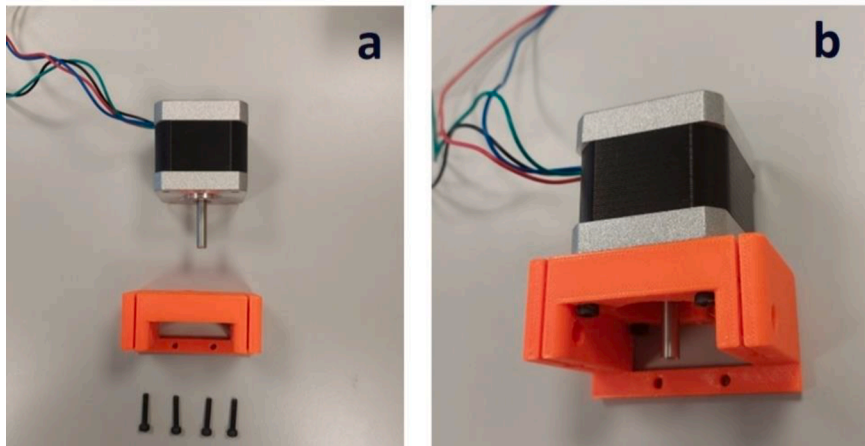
Assembly of the NEMA 17 stepper motor to the end motor support. (a) Exploded view of the required components (b) assembly.
